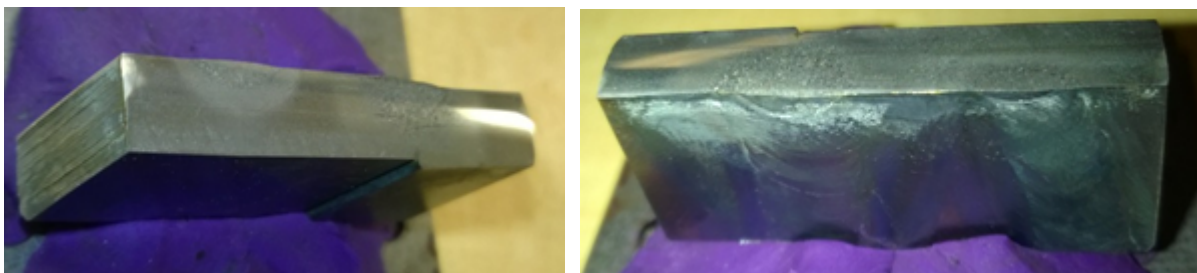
Cross-section of bead-on-plate and single-square groove welds on 1018 steel made with autogenous GTAW. Semi-circular weld bead and heat affected zone are visible.
